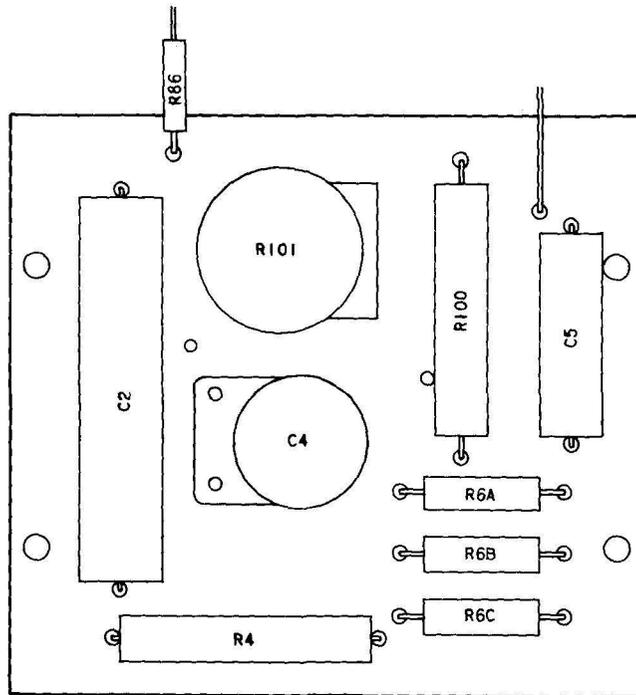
Printed Circuit Board Assembly, Part No. 400D-65C—Models Listed in 1.06
